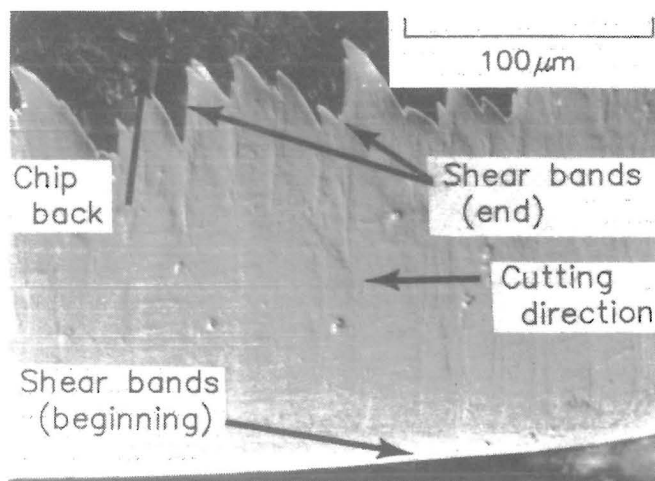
Shear bands through longitudinal cross section of chip. Note lack of cracking in chip body and ductile smearing of shear bands at chip face.
